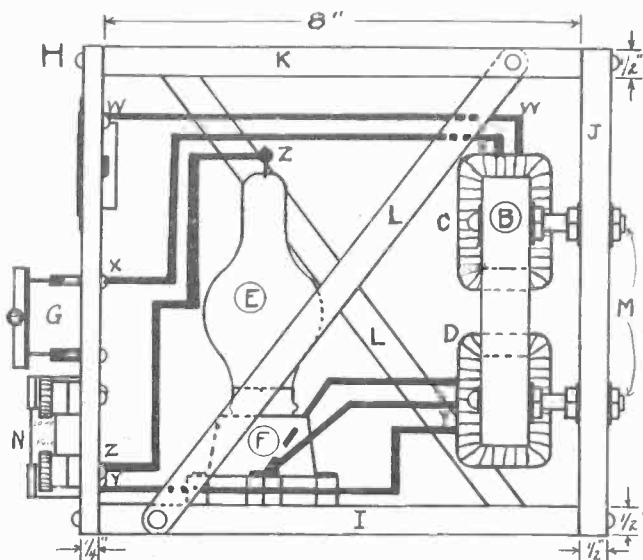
Schematic diagram of the complete charger, showing arrangement of parts on front and back panels. The heavy black lines designate the wiring.
